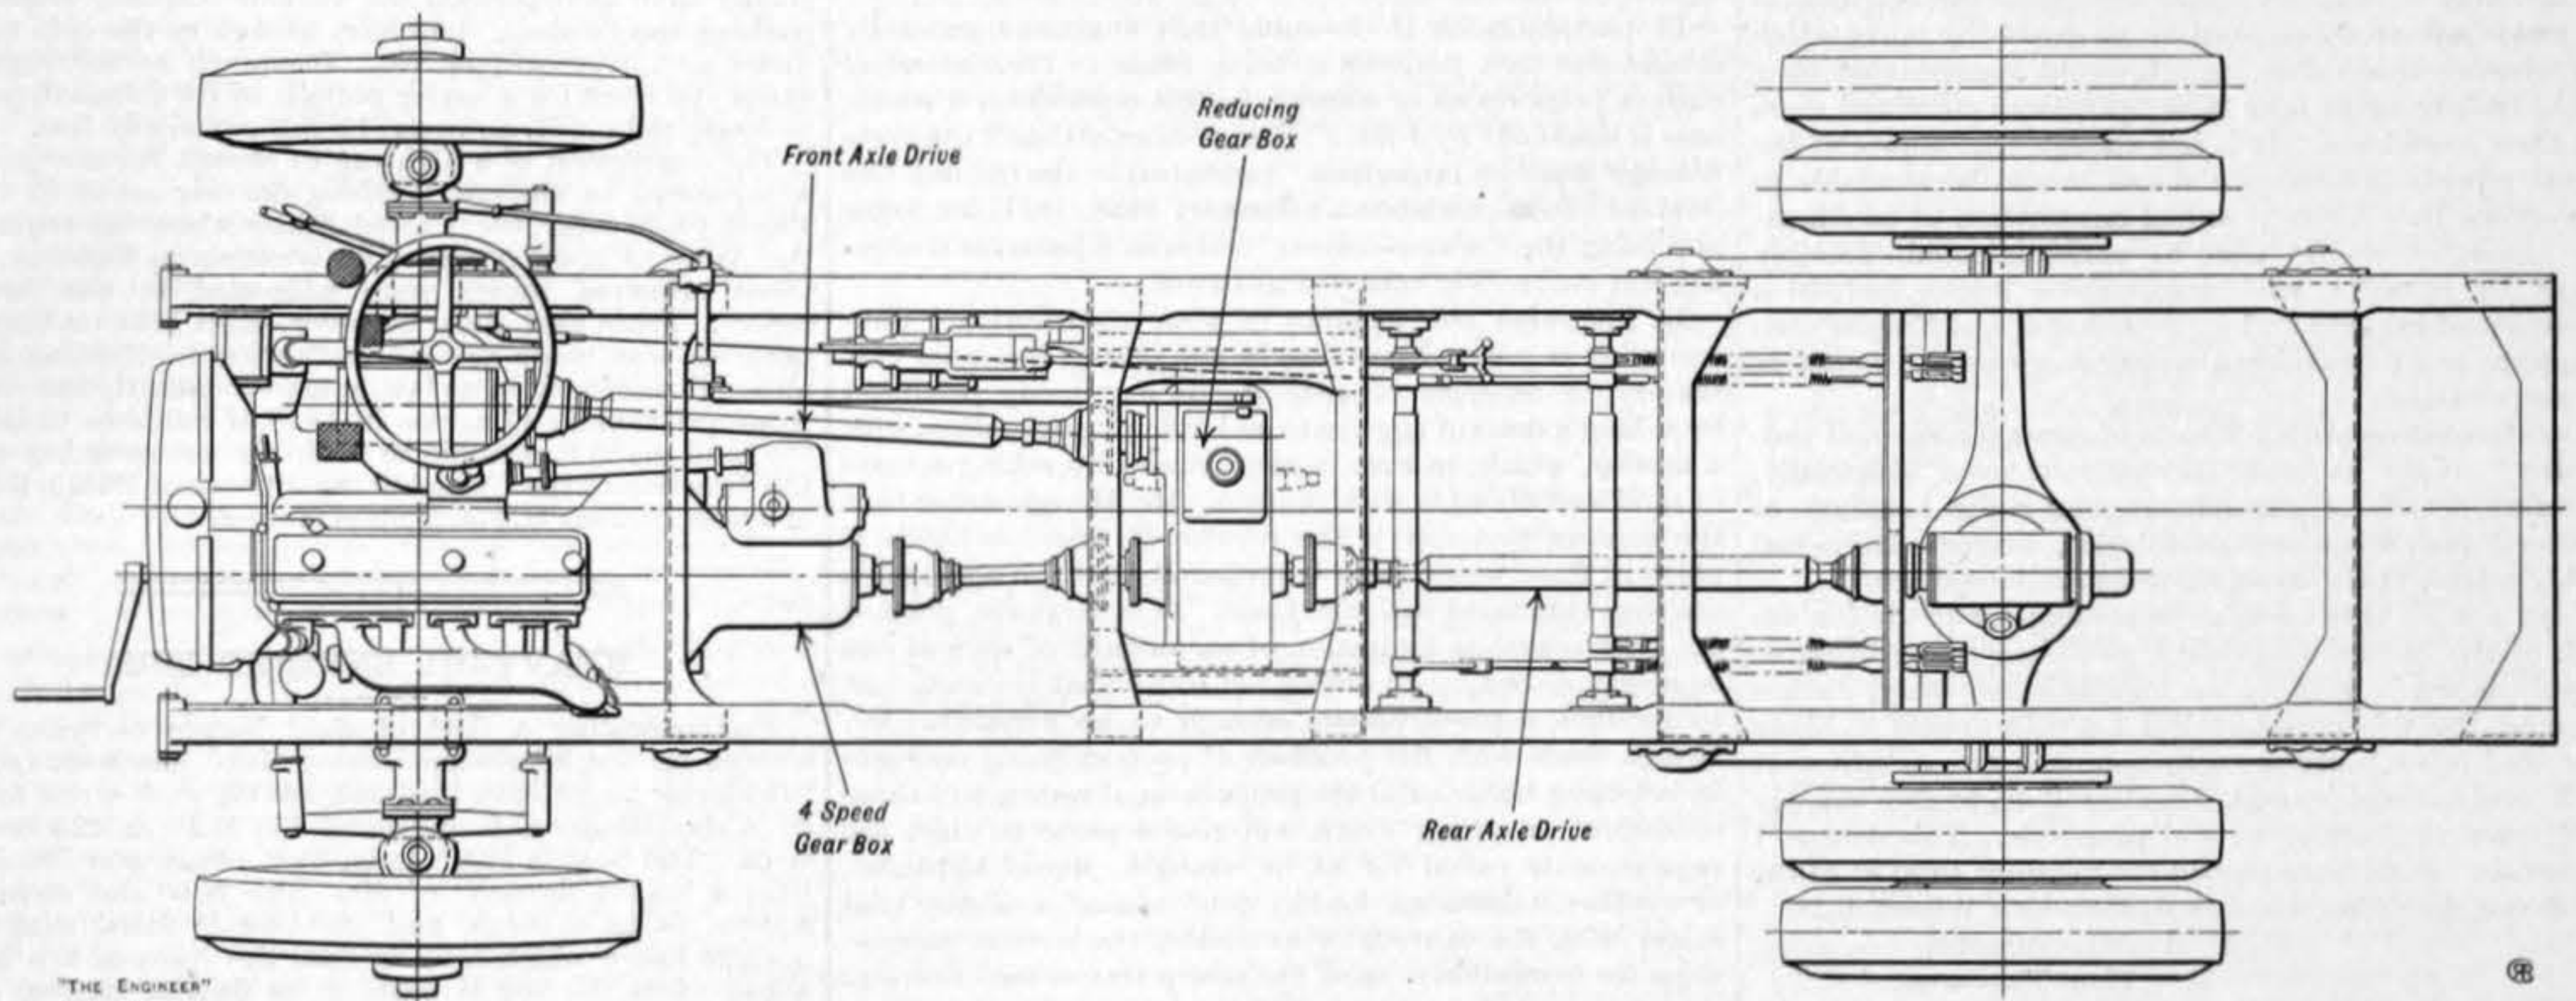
CHASSIS WITH AUXILIARY FRONT-WHEEL DRIVE—HARDY
